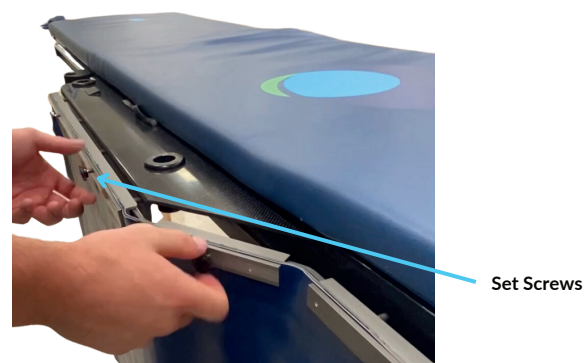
Attaching Side Flex Shield - tighten set screws against Side Rails
